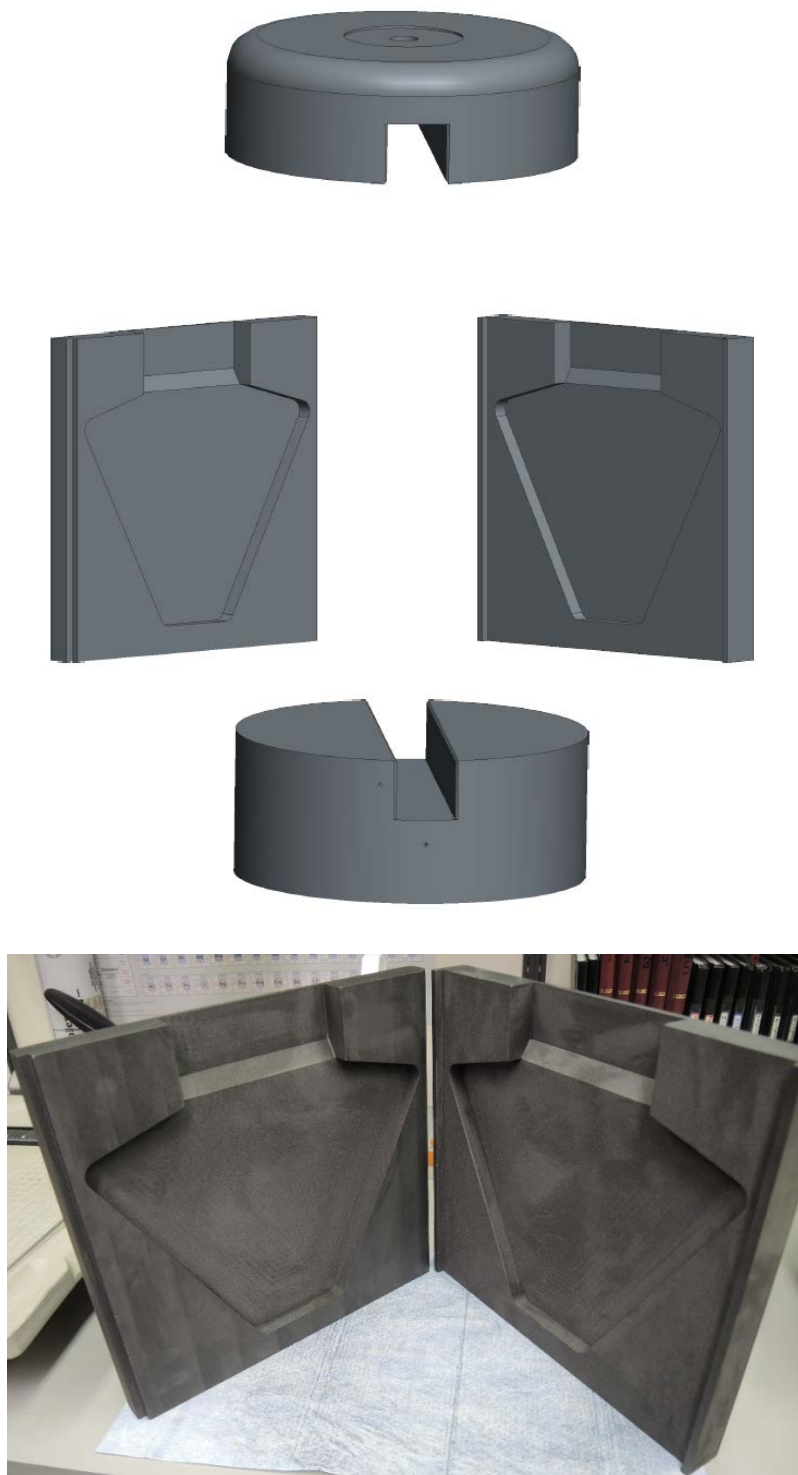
a.) An exploded view of the first iteration of the mold design. The bottom clamp, two mold halves, and top clamp are visible. b.) The finished mold halves are shown for comparison.
